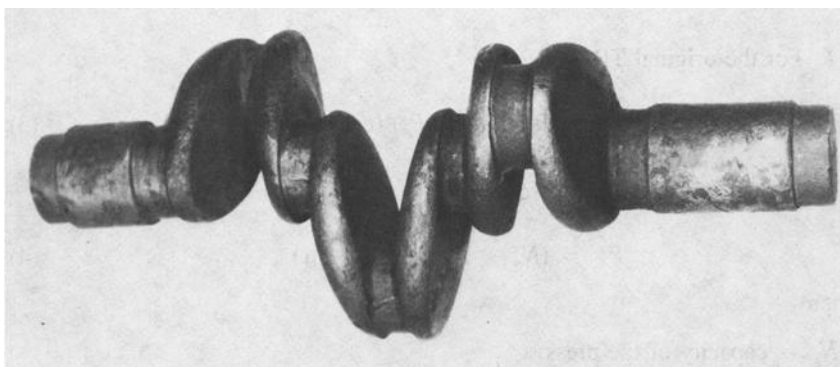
Model crankshaft made of steel. The journal diameter is 50 mm.
